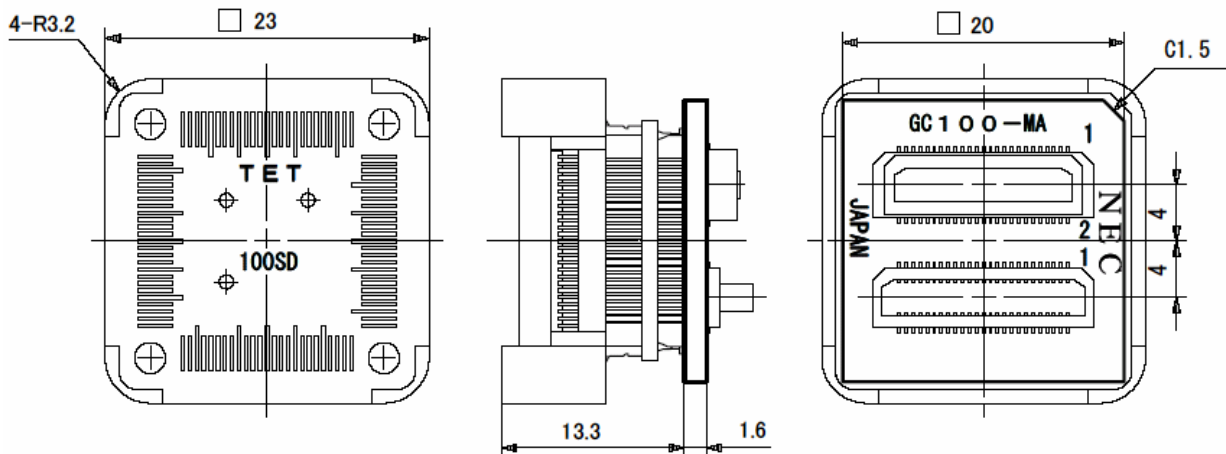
Mount Adapter for V850E/IA4 (100-Pin GC Package)
